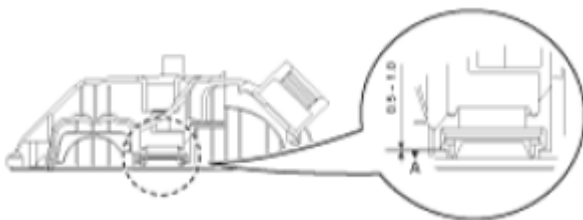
Identifying Oil Seal And Gasket Dimensions
